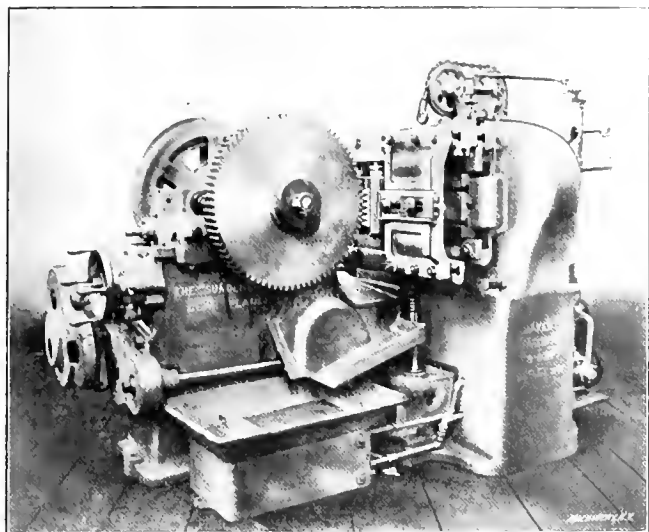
The Sunderland Patent Spur Gear Generating Machine
